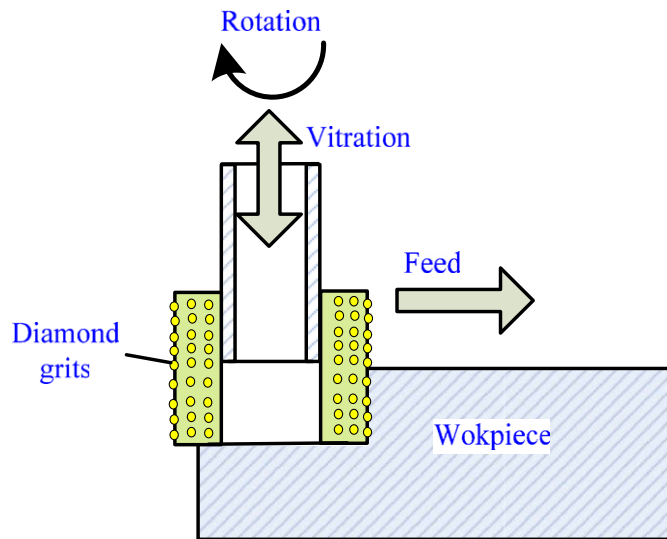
Illustration of the rotary ultrasonic machining using the side of cutter.
